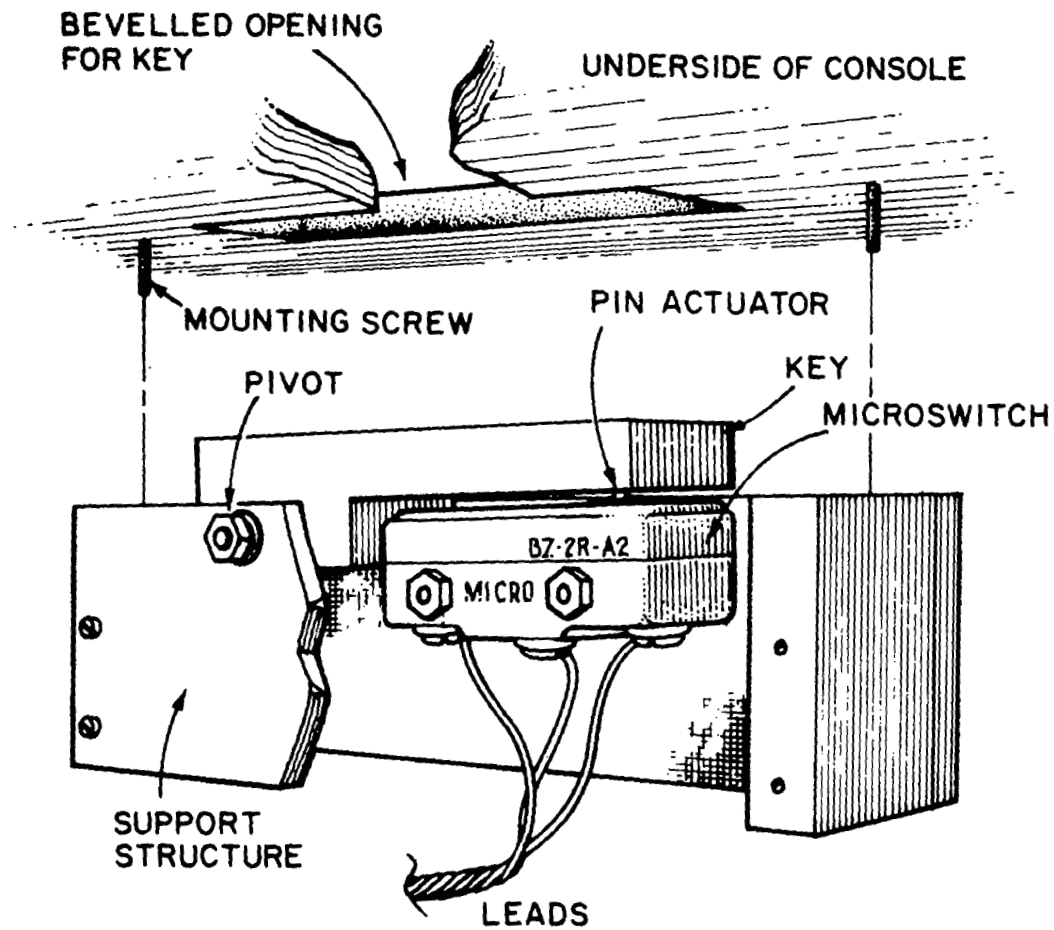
CUTAWAY DRAWING OF THE CONTROLLER
